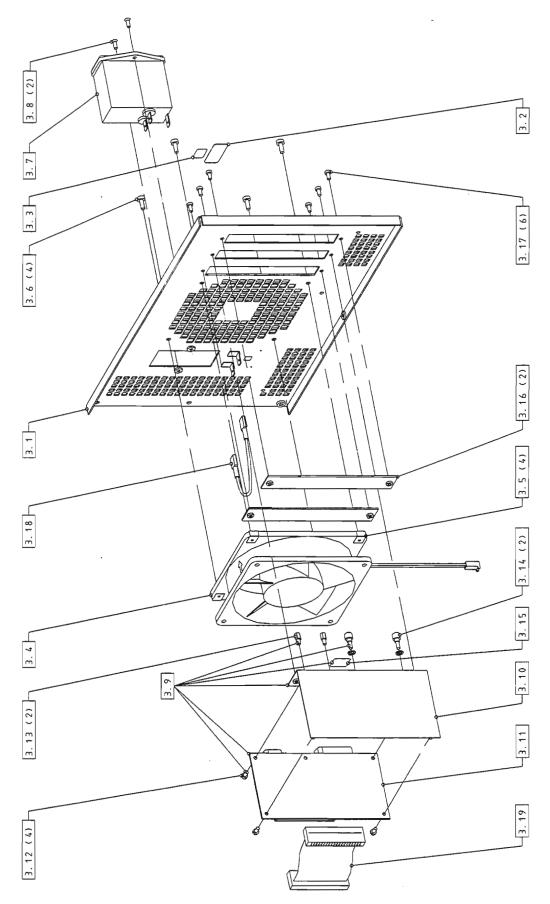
9374/M/L/TM Rear Panel Exploded View
